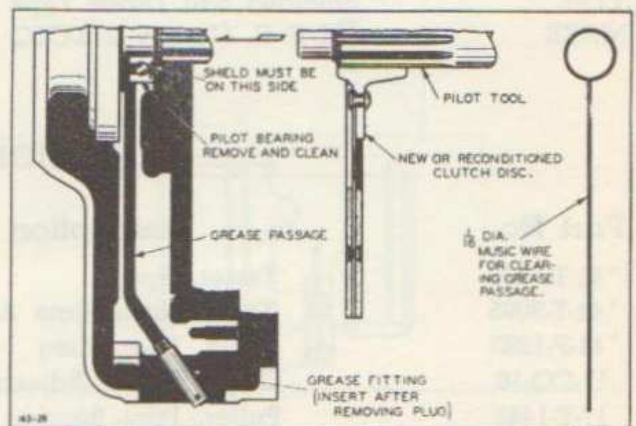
Cleaning and Lubricating Pilot Bearing
